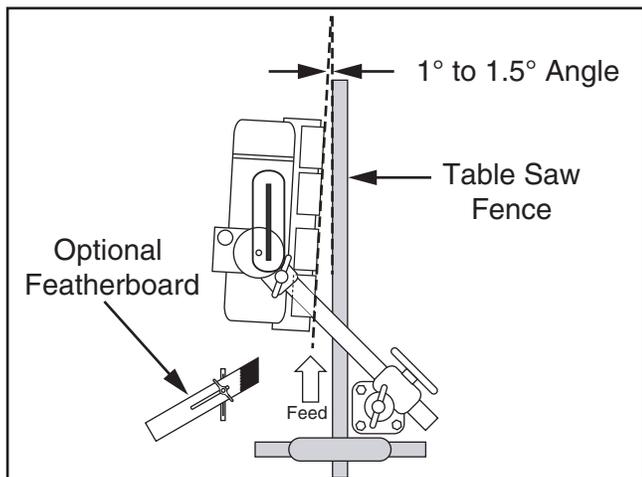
Example of power feeder toe-in on a table saw (4-roller model shown).
